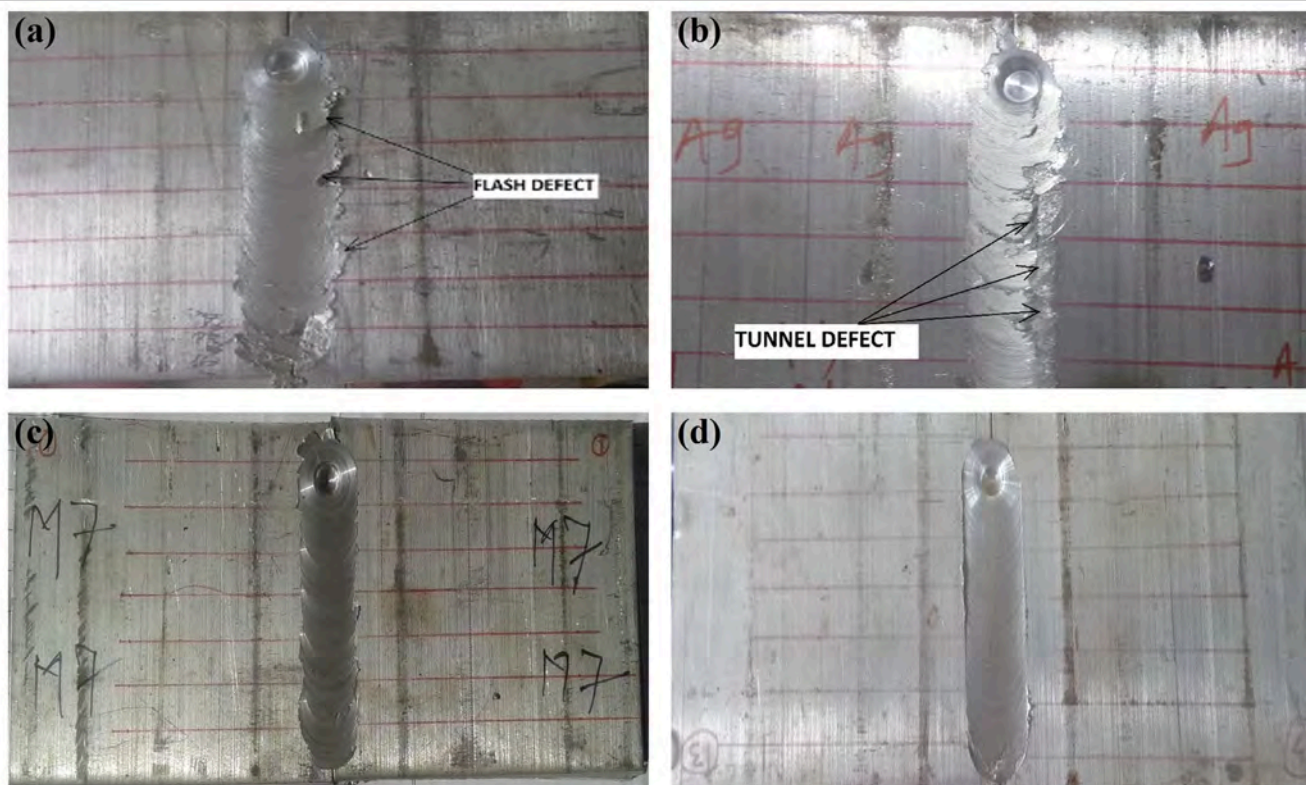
Weld appearance obtained under different backing conditions: (a,b) aluminium backing condition, (c) mild-steel backing condition, and (d) fly-ash-bed backing condition
